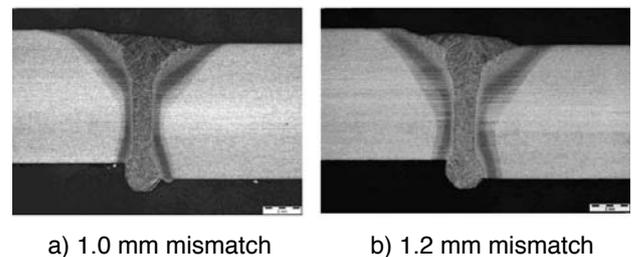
Cross-section through adaptively controlled hybrid weld made over joint with hi-lo mismatch of 1.0 mm a) and 1.2 mm b).
